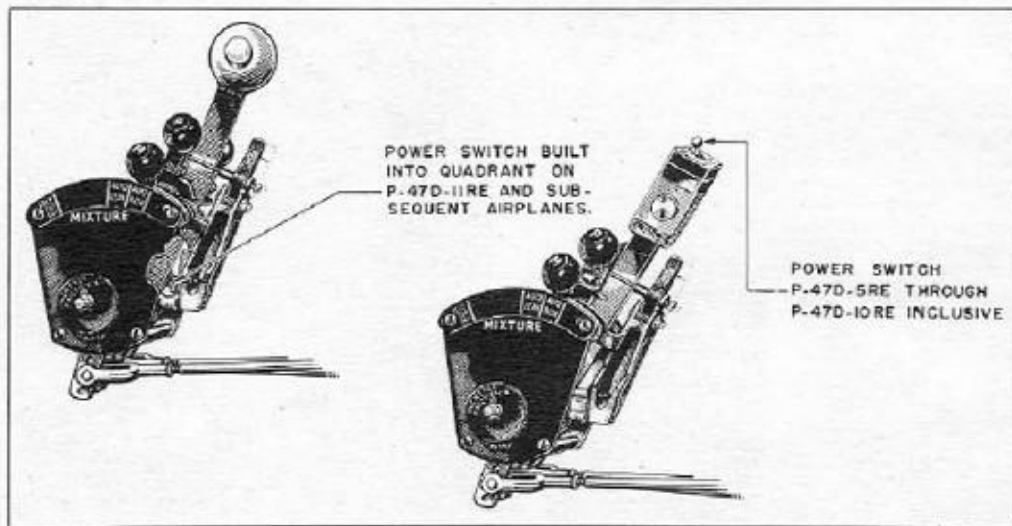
Throttle Quadrant (Sheet 2 of 2 Sheets)
